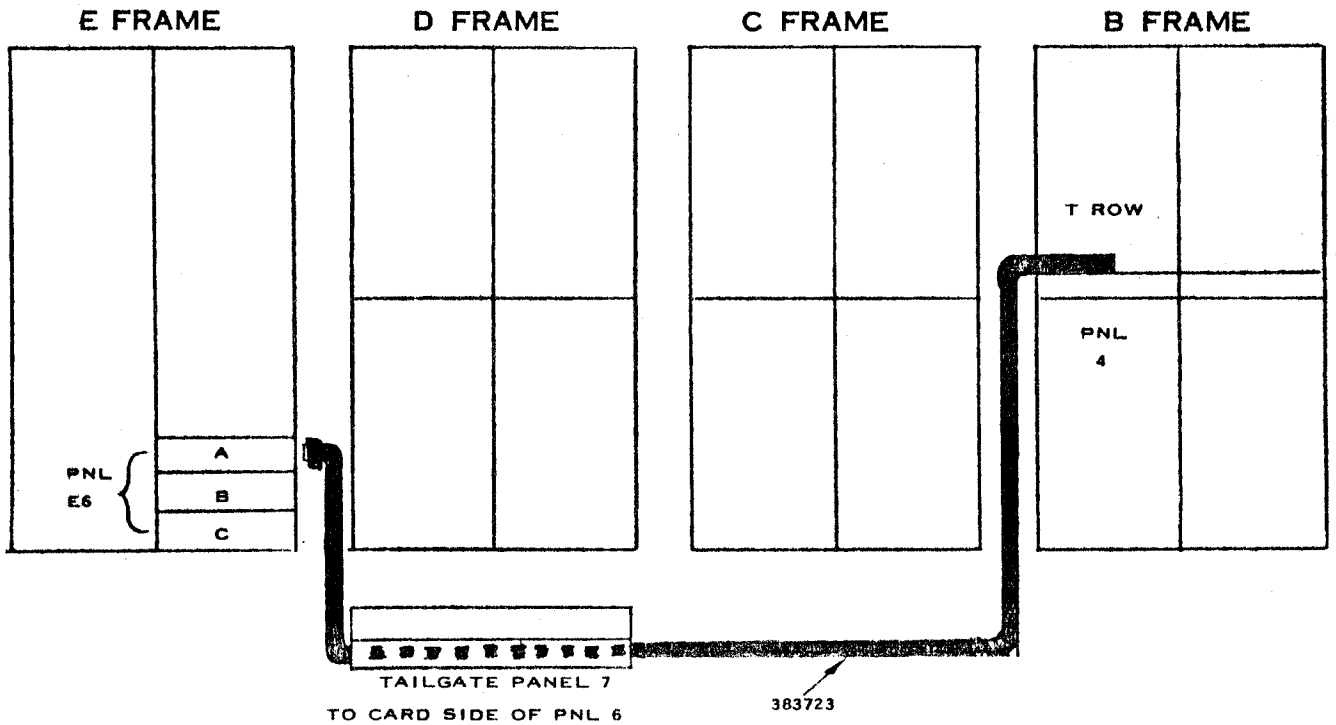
CABLE ASSEMBLY 383723 ROUTING DIAGRAM
